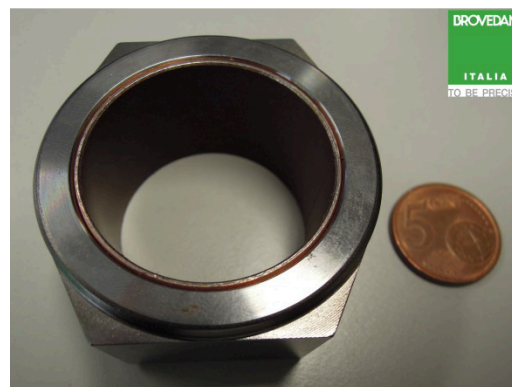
Workpiece under cleaning analysis by FBM system
